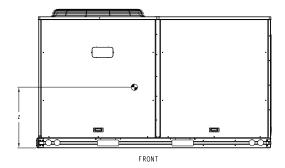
Unit Dimensional Drawing - 12 Size Unit (cont.)
